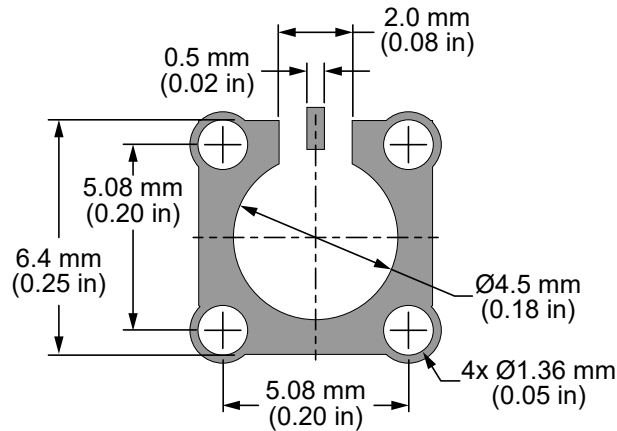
Recommended PCB Dimensions for the CONSMP001-G-T
